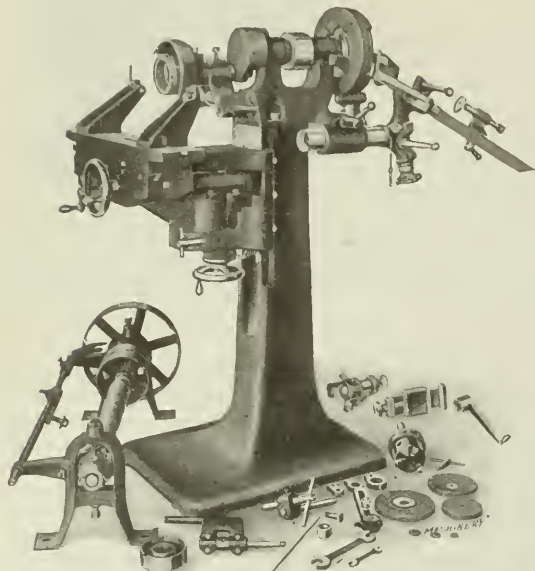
Grand Rapids No. 2 Universal Drill, Cutter and Tool Grinder
